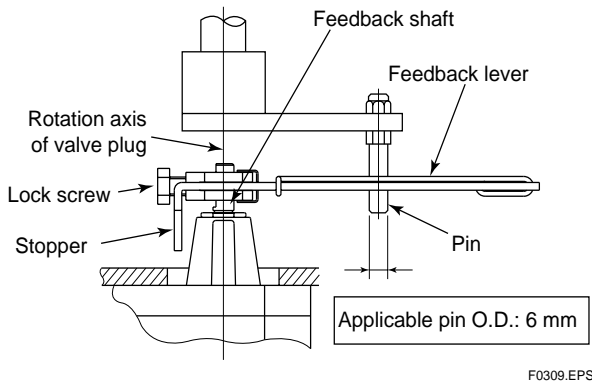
Inserting Pin into Hole of Feedback Lever
